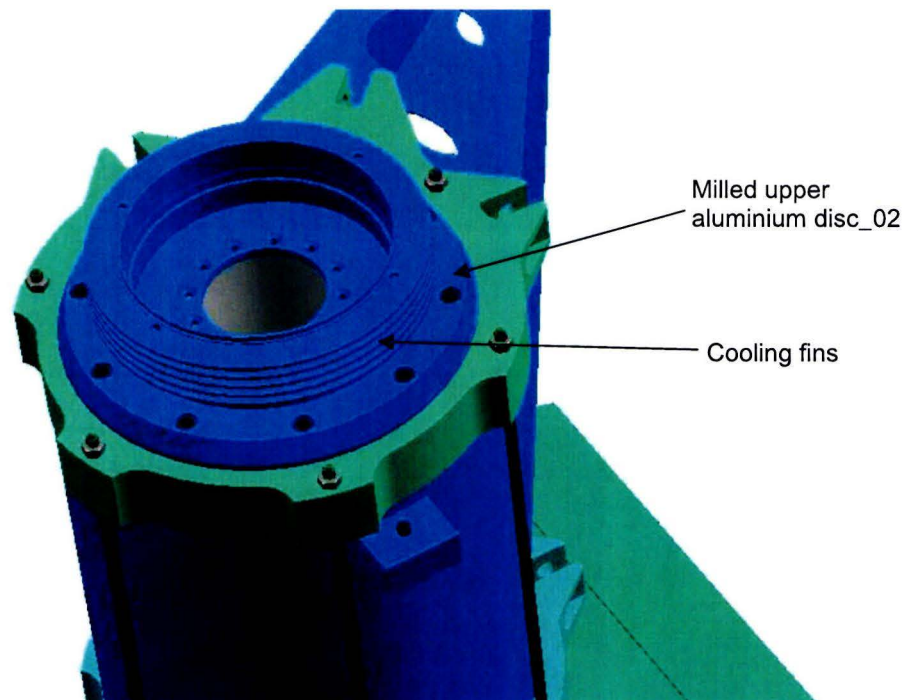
"Milled upper aluminium disc_02" mounted to number 01
